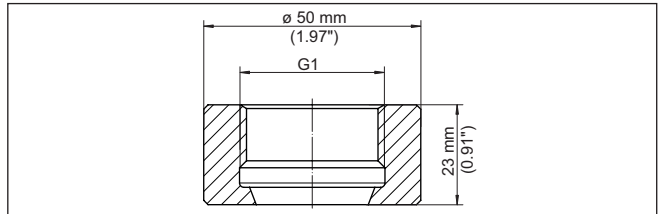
Dimensions direct welded socket G1 (ISO 228-1) - Cone seal
